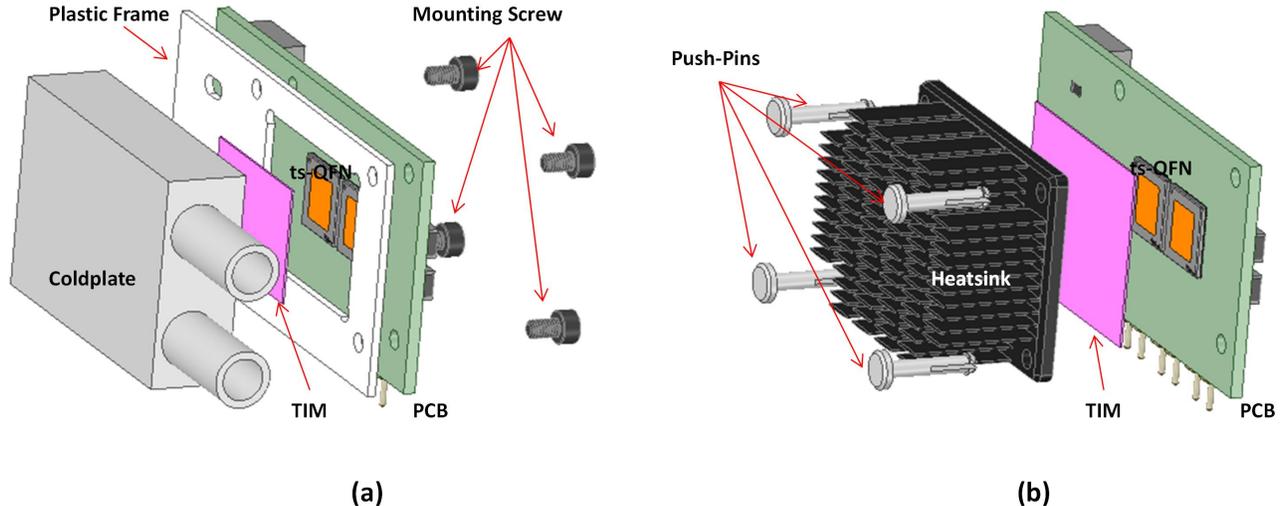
Exploded View of Evaluation Board Assemblies (LMG3522EVM-042) with (a) Coldplate and (b) Heatsink
